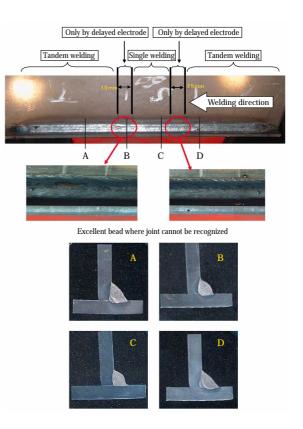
Tandem Welding of Thin Plate (Welding Speed: 100 cm/min.)
